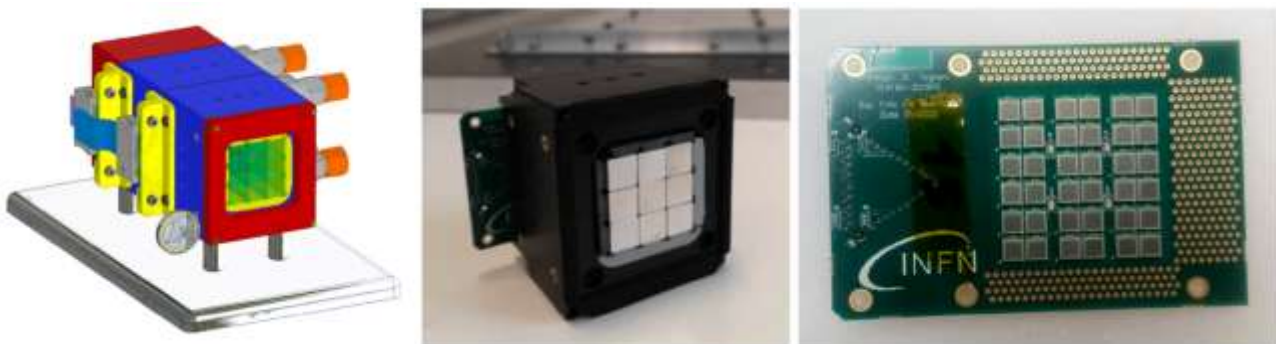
Two-layer 3 × 3 crystal CRILIN prototype: mechanical drawing (left), assembled front module (centre), and PCB with SiPMs for one layer (right).
